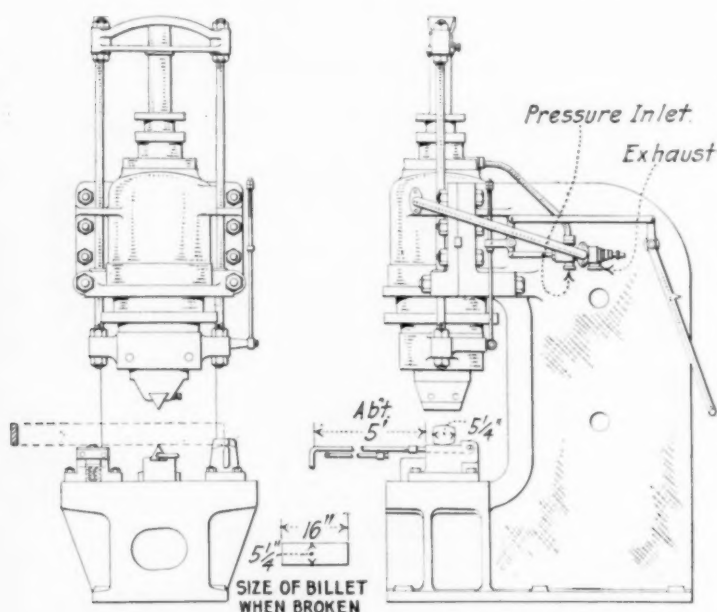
BRITISH 200-TON VERTICAL HYDRAULIC BILLET BREAKER
